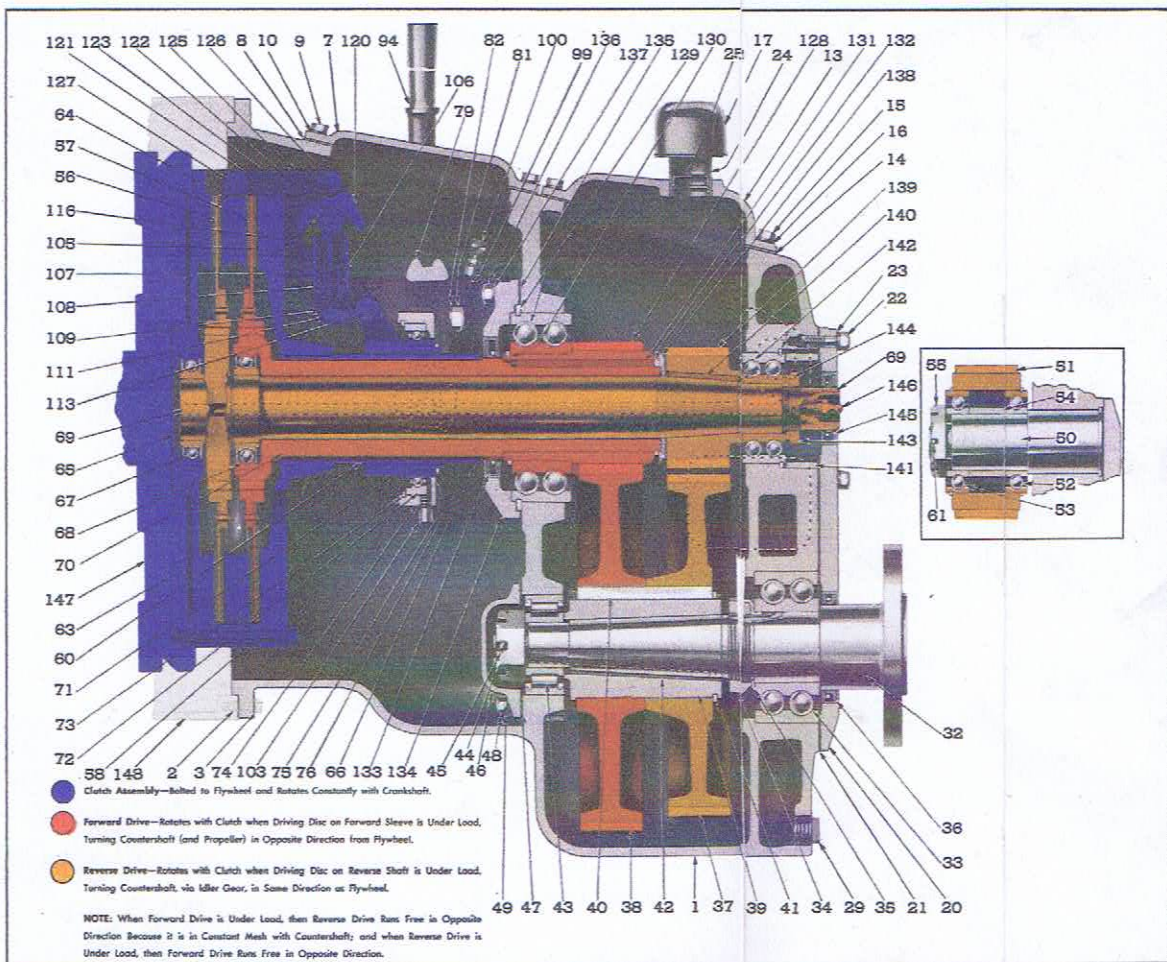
TYPE "A" (TWIN DISC) REVERSE AND REDUCTION GEAR ASSEMBLY.
